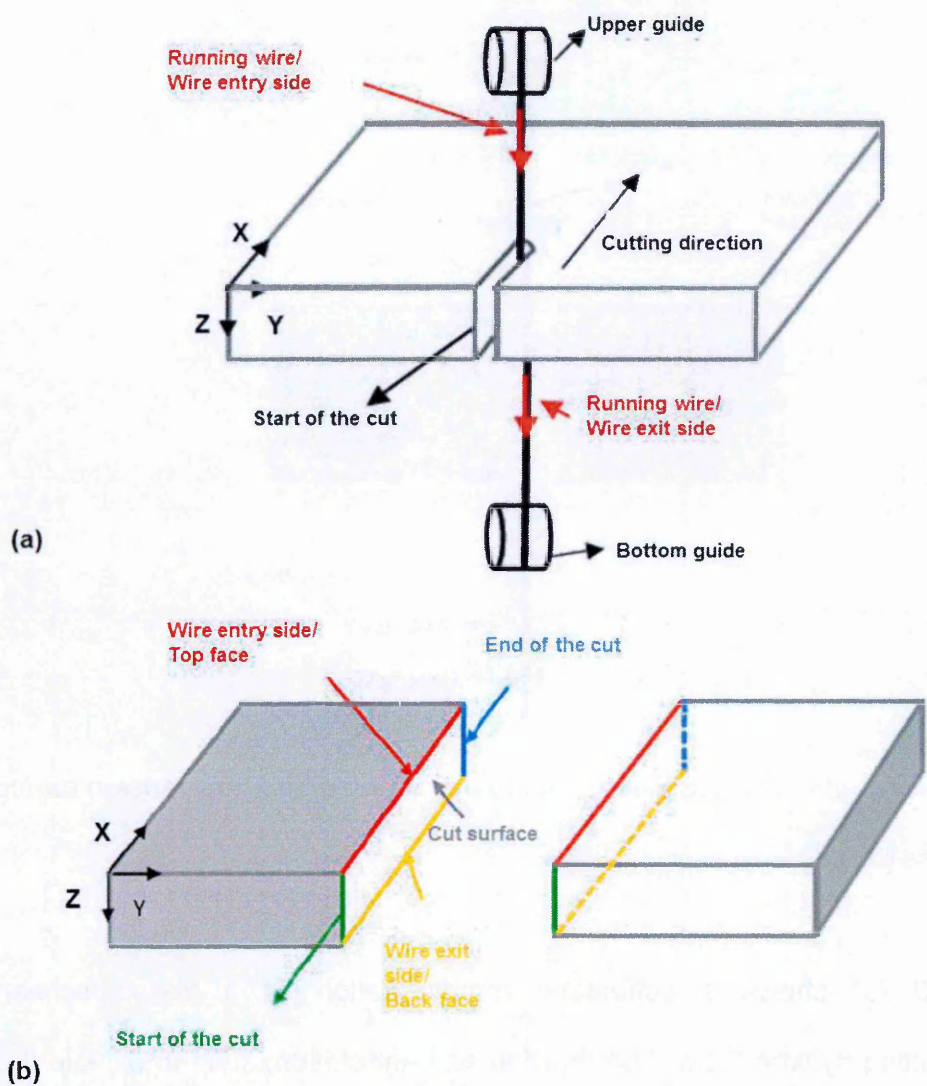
(a) Schematic representation of a test specimen being cut by WEDM and (b) labelled edges of cut parts (39).
